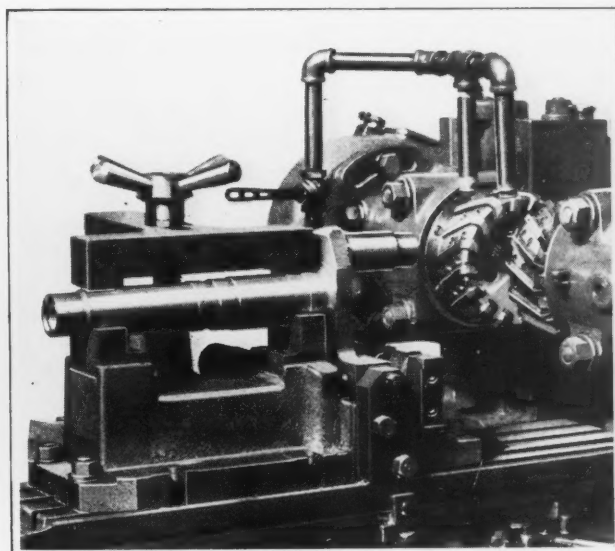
Straddle-milling the Edges of the Rear Crank Cheek in the Fixture Shown in Fig. 7
